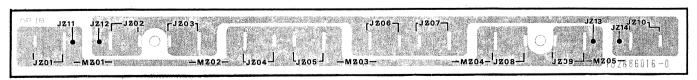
Dial Lamp Board — PZ01 Component Assembly Diagram
